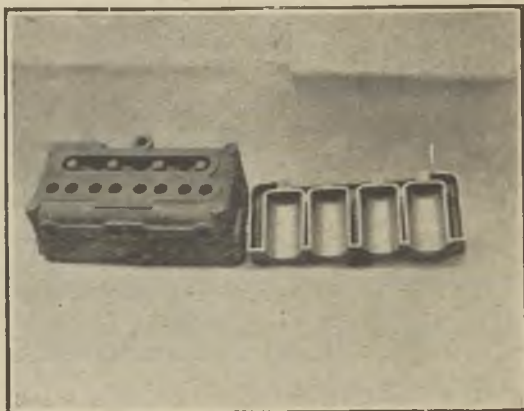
A 63-M/M BORE CYLINDER CASTING.
